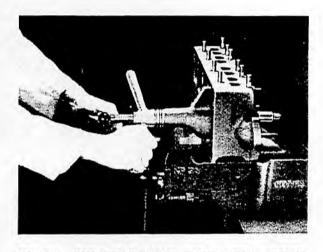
REPLACING VALVE GUIDE USING SERVICE TOOL MF60A
